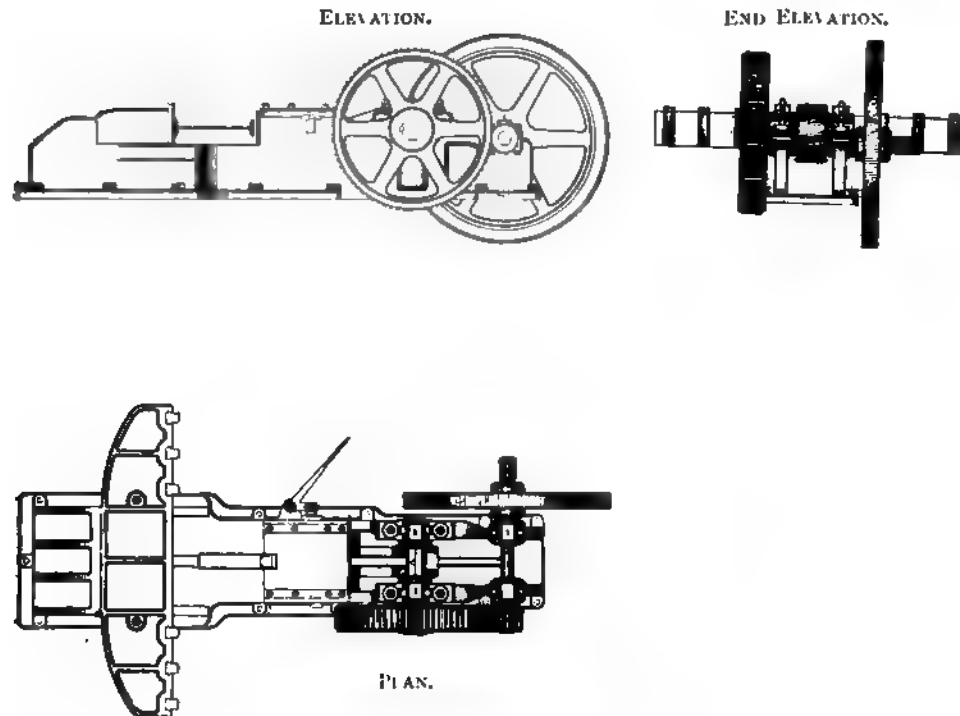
CROSGROVE'S PATENT BEAM STRAIGHTENING AND BENDING MACHINE.
